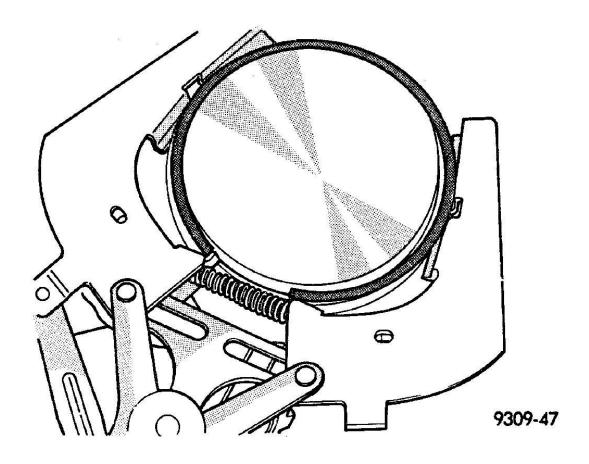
Using Piston Ring Remover/Installer Courtesy of CHRYSLER LLC
